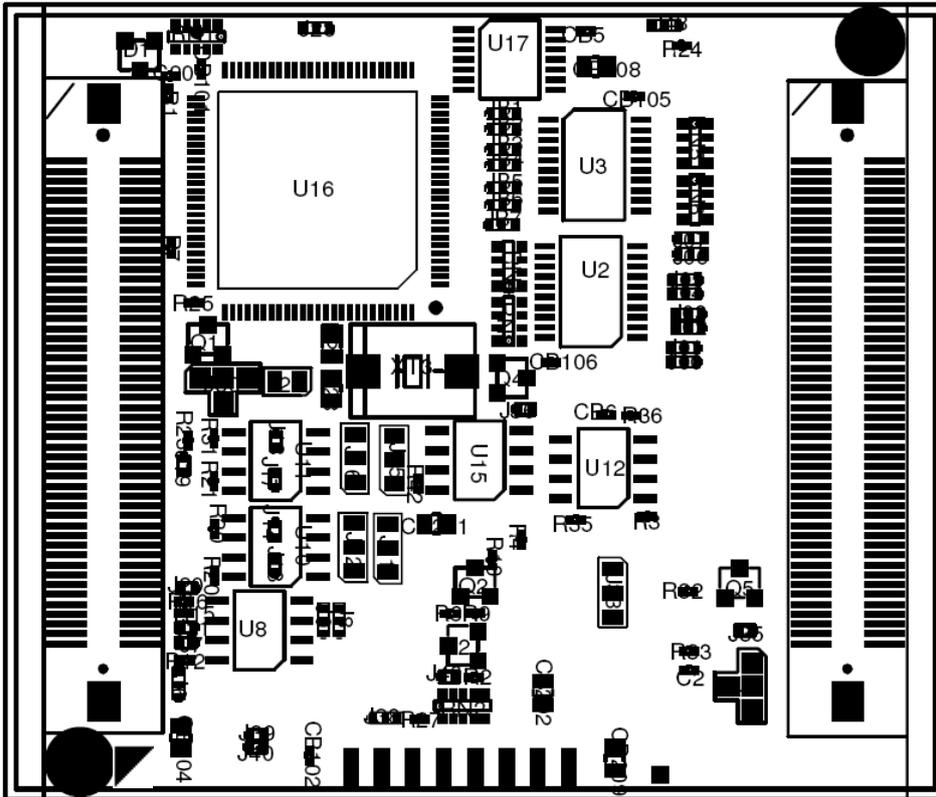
Location of the Jumpers (Connector Side Bottom View)
